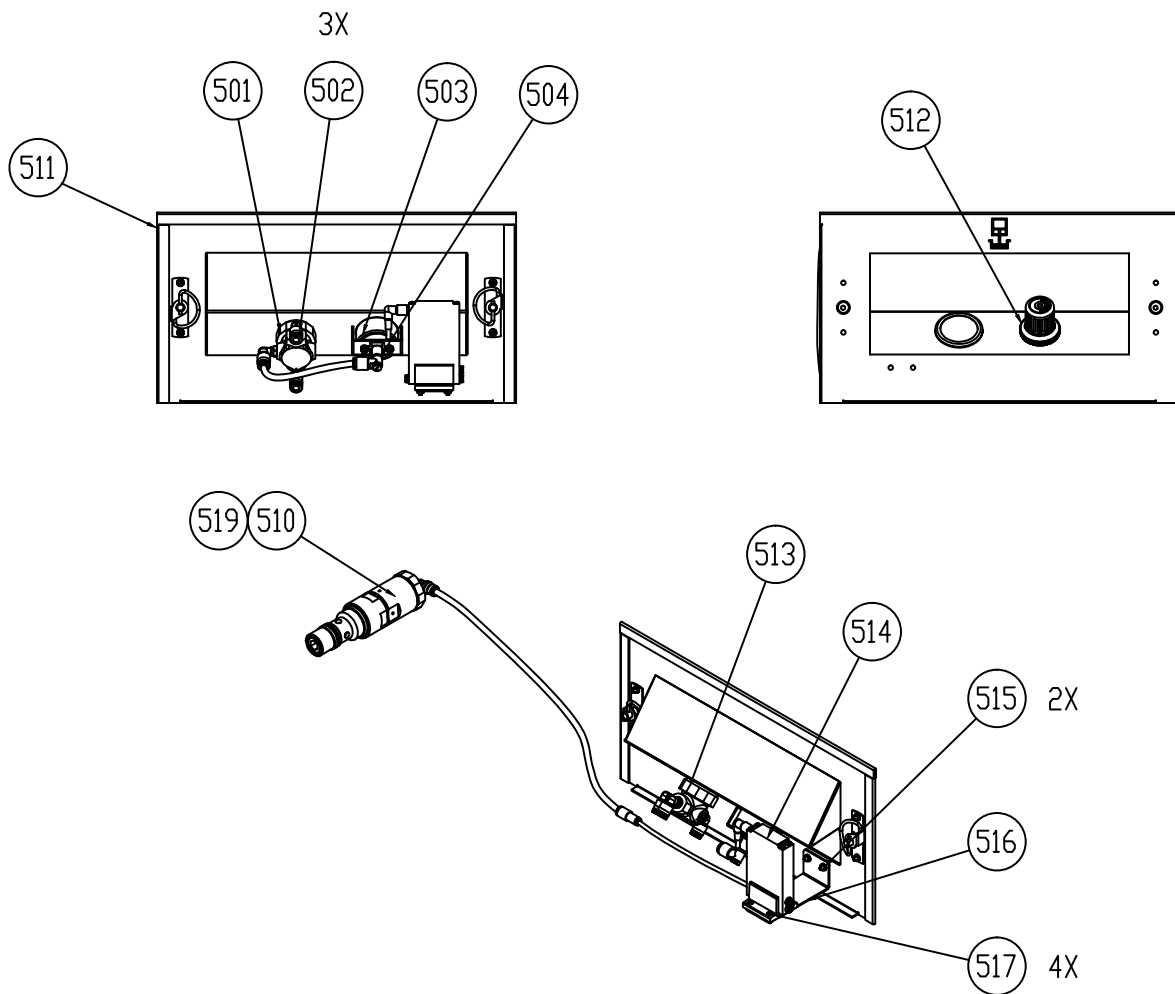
Automatic Pressure Control and Cylinder Pressure Control Assembly Parts
